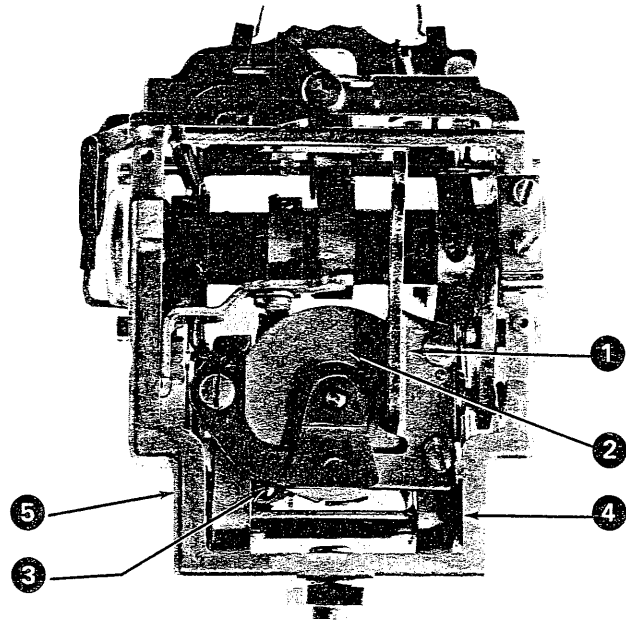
Carrier and Rocker Removal (Steps 15-19)
